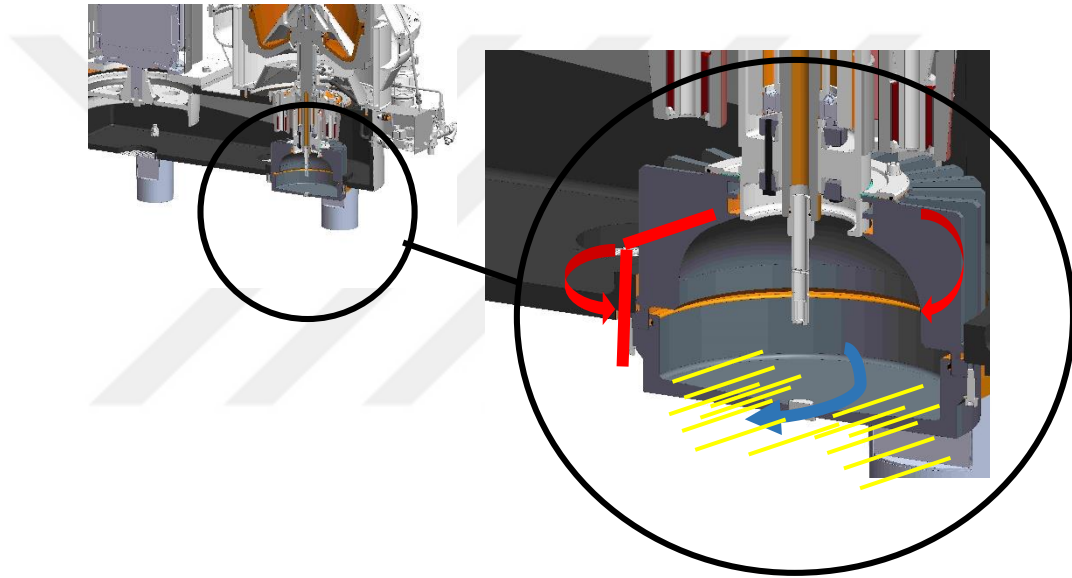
Without fin oil chamber of the testing separator centrifugal separator (HAUS Centrifuge technologies).
